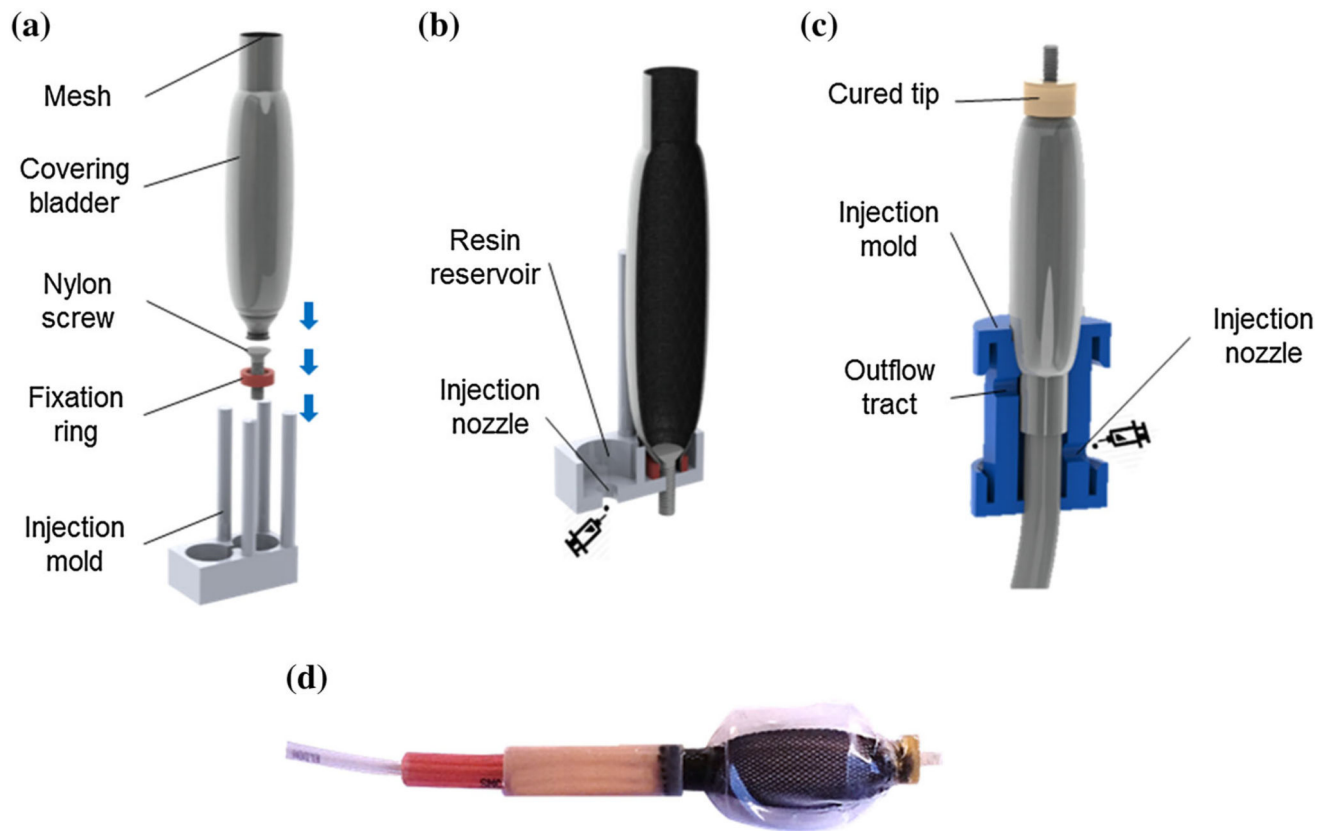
Schematic of the device fabrication process: (a) device tip: outer bladder and mesh are collapsed over a nylon screw and fixed by a TPU locking ring before positioning in the injection mold; (b) cross section during injection molding; (c) device base: insertion of inner bladder together with supply tubes and polymer casting; (d) photo of finalized contraction device.
